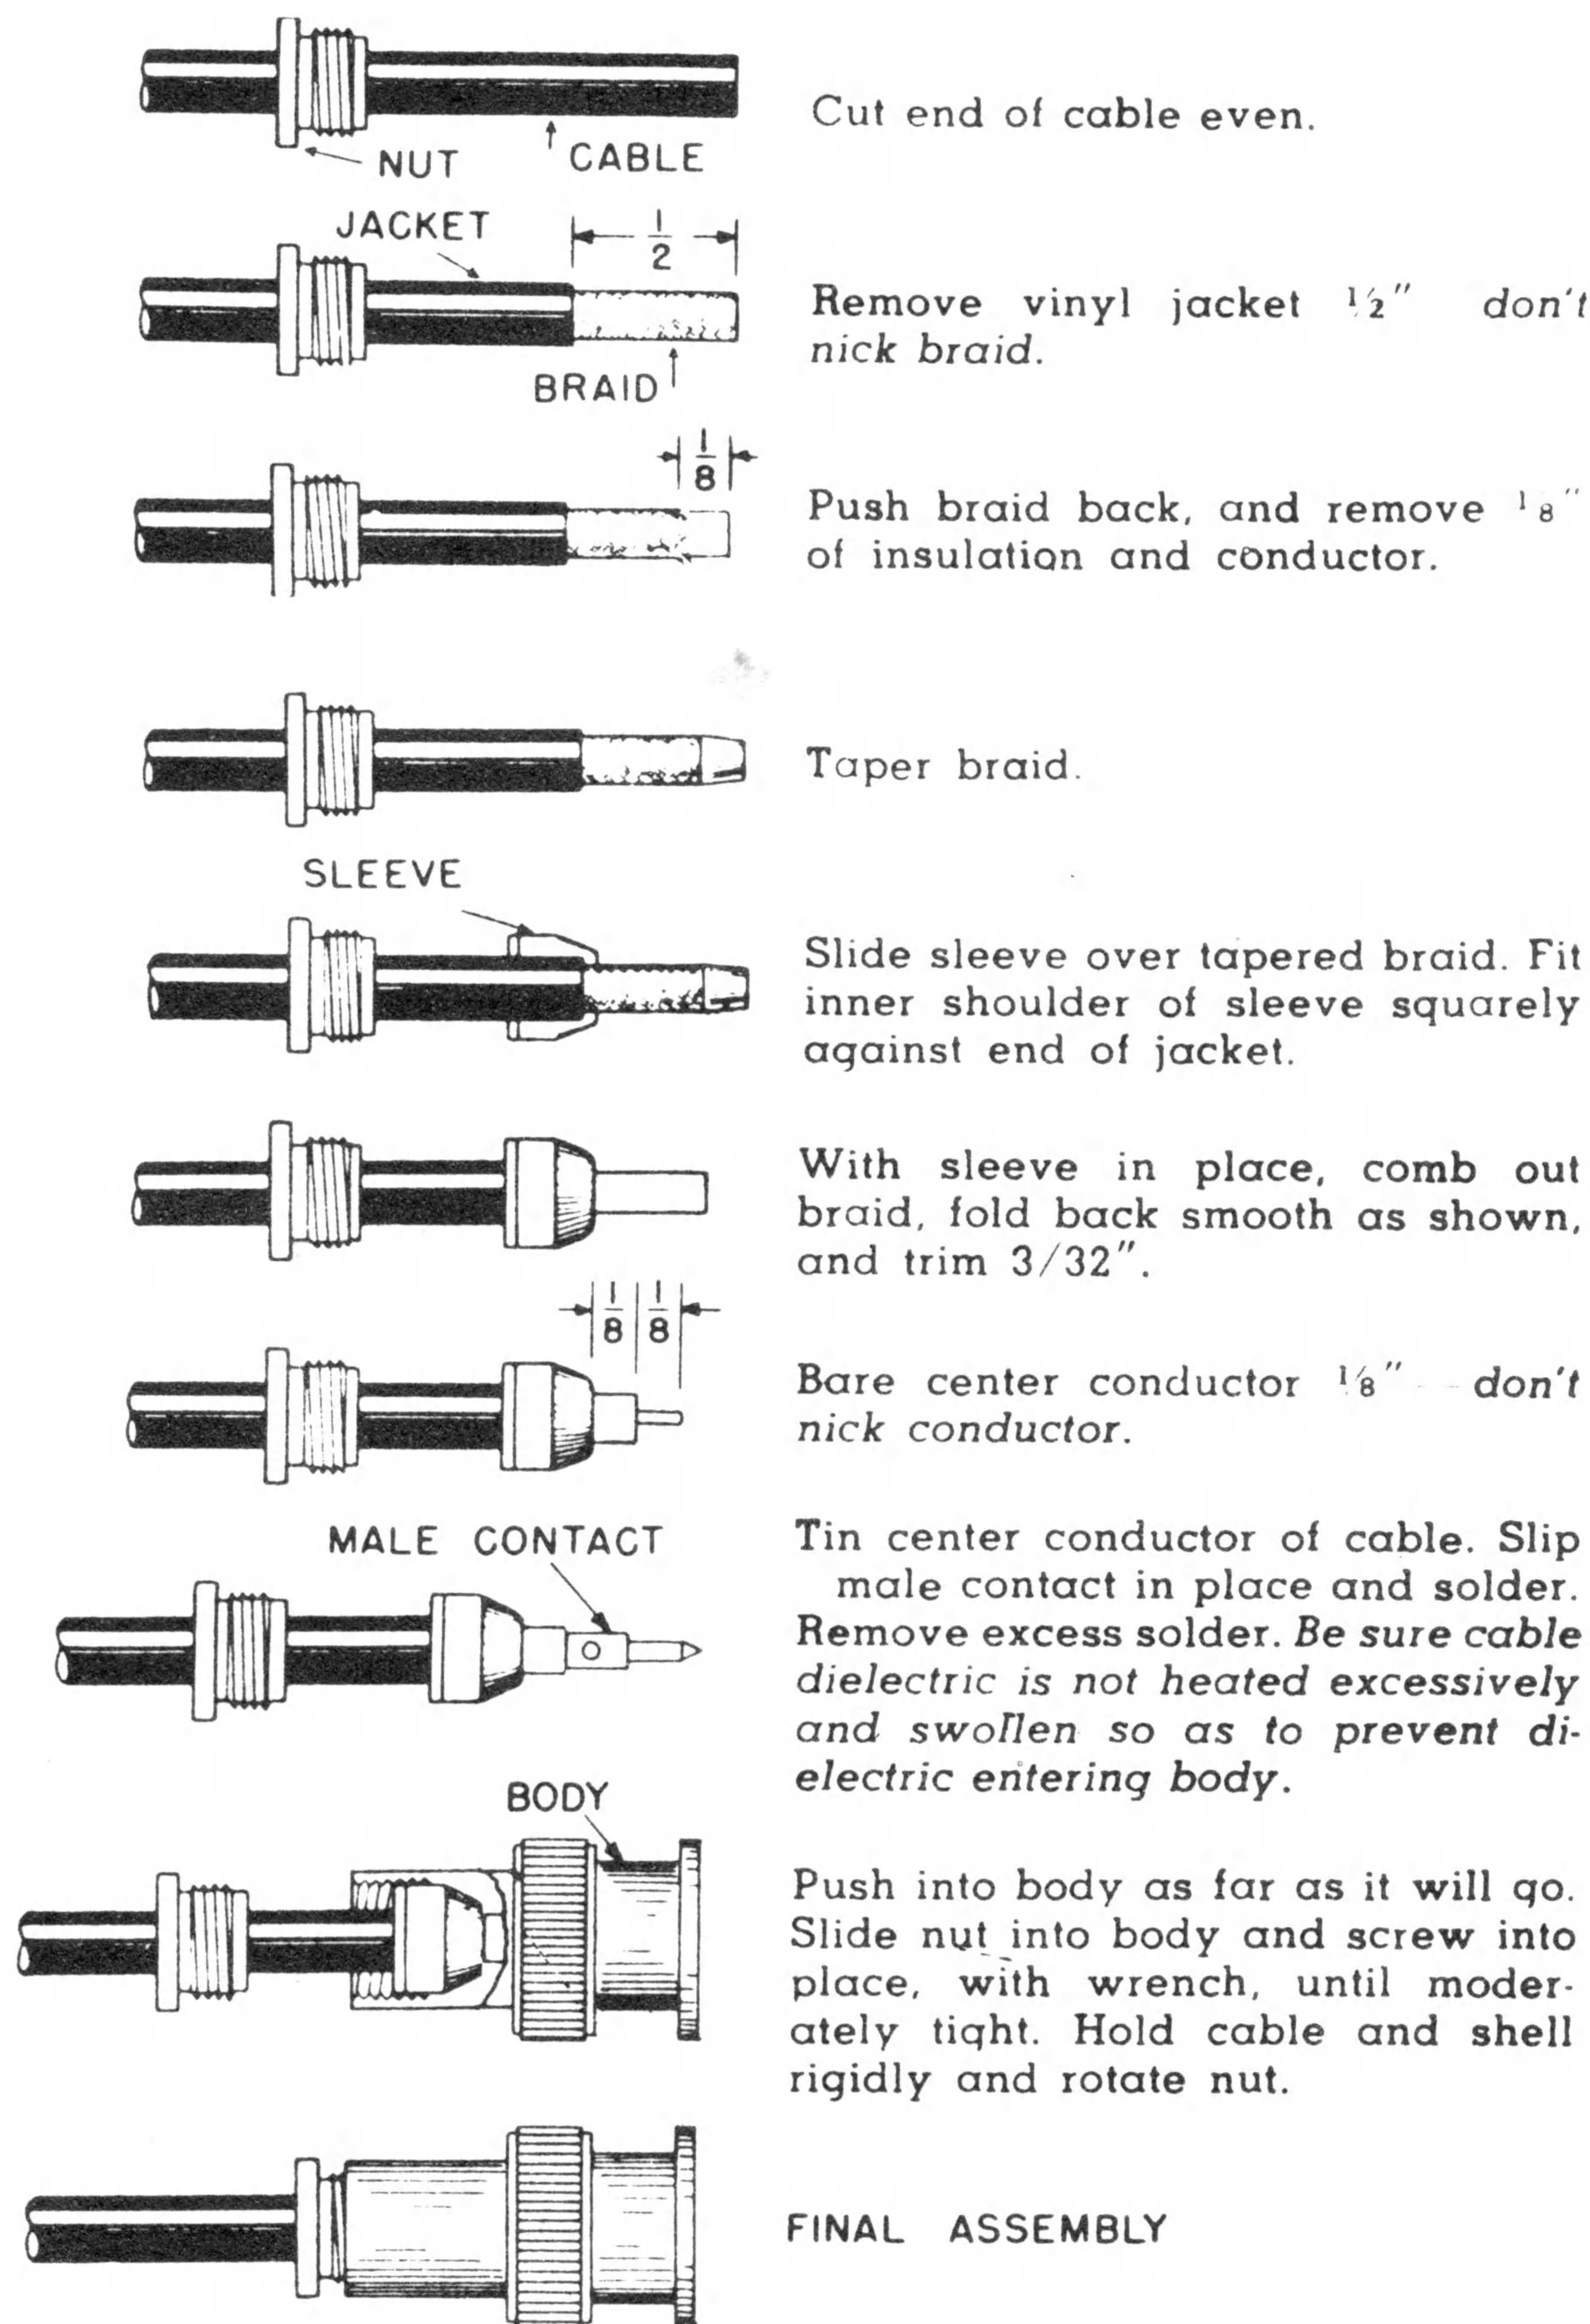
Cable P101, Assembly Instructions for Connecting UG-88/U to RG-58/U.
